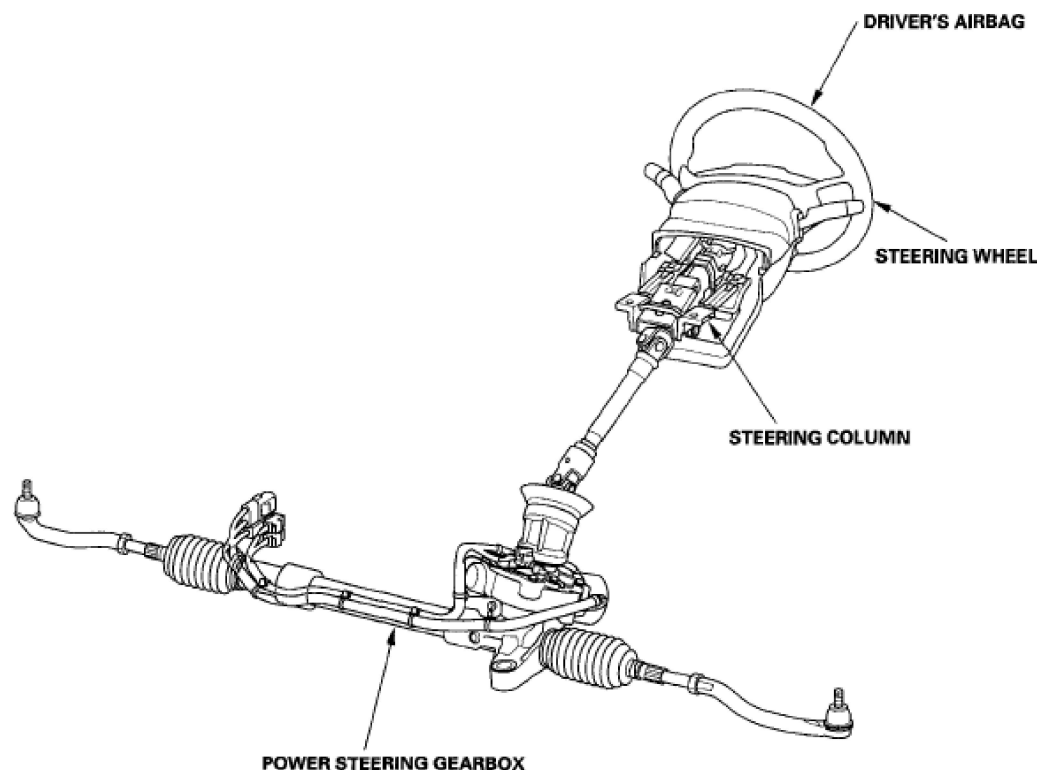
Identifying Hydraulic Power Steering EPS Type Component Location
